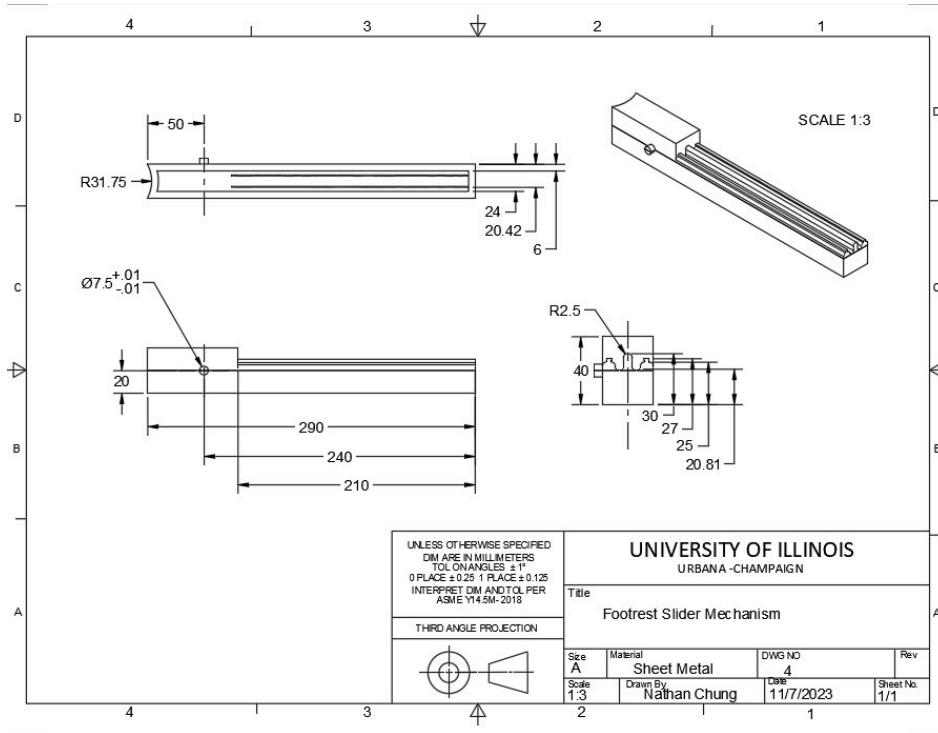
Slider Rail Mechanism Dimensioned Drawing
